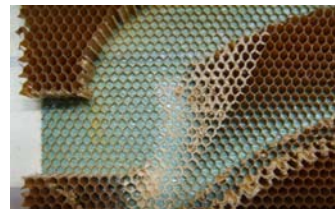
Shape machining result according to feed rate (500mm/min and 800mm/min)
